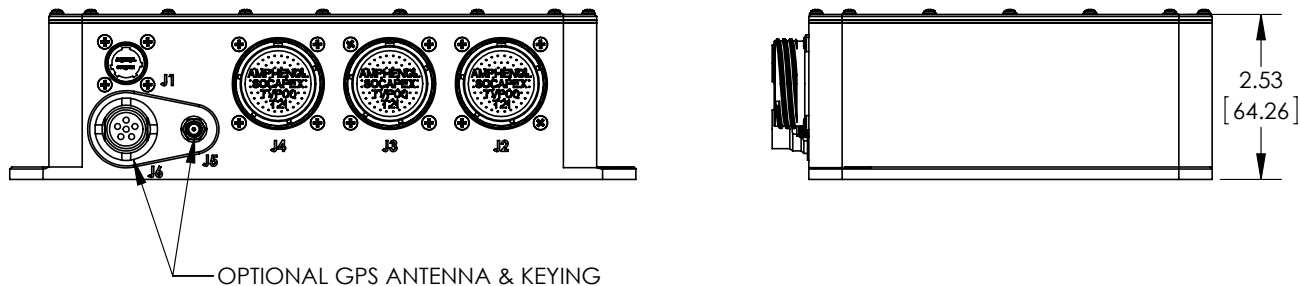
DBH-672 dimensional line drawings (measurements shown are in inches and [cm])
